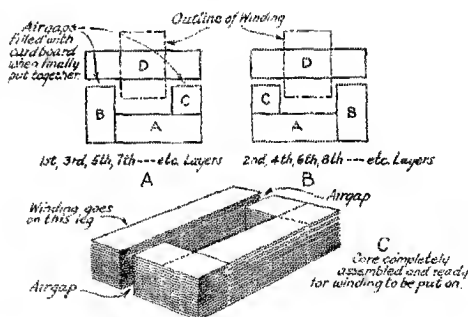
HOW TO PUT A CHOK COIL CORE TOGETHER.
